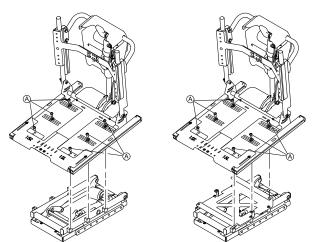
Example of tilt module Fig. 7-7 Example of anterior tilt wedge
